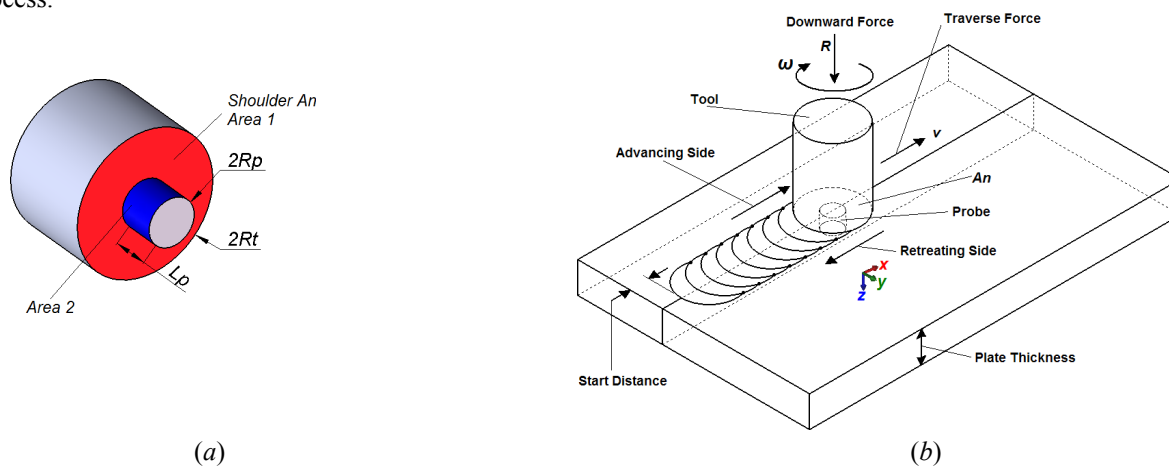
FSW process: (a) welding tool geometry and (b) FSW process parameters.
